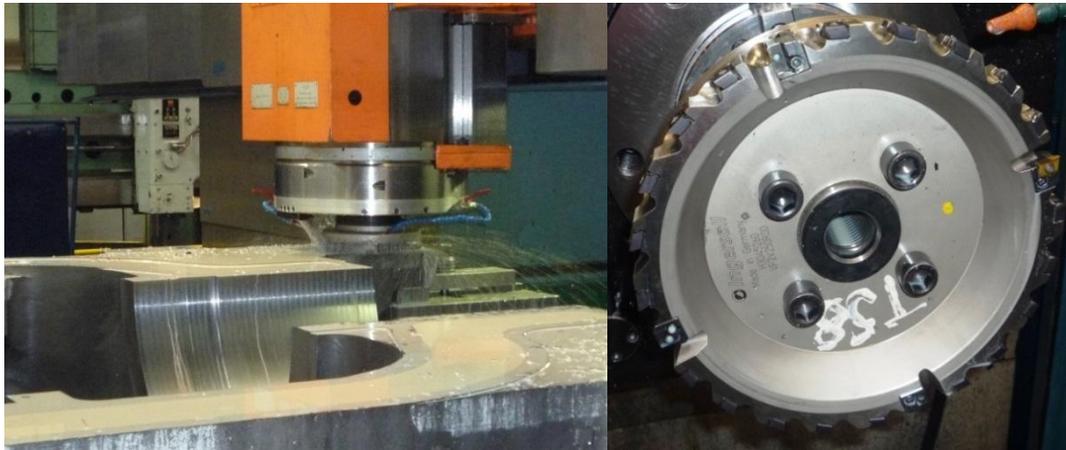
Milling of dividing plane of steam turbine casing and detail of milling head ($\varnothing 315$ mm)
